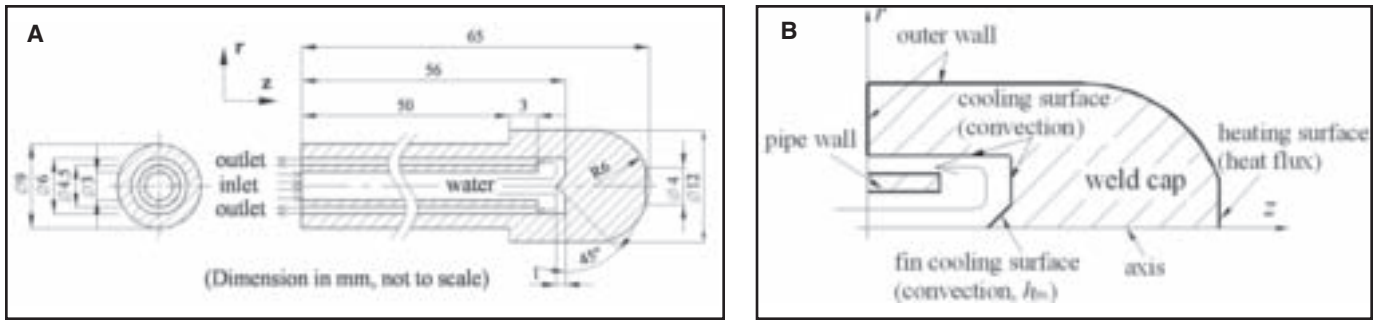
A schematic representation of the electrode with new weld cap design: A — Geometry of the electrode; B — new weld cap design and axisymmetrical computational domain.
